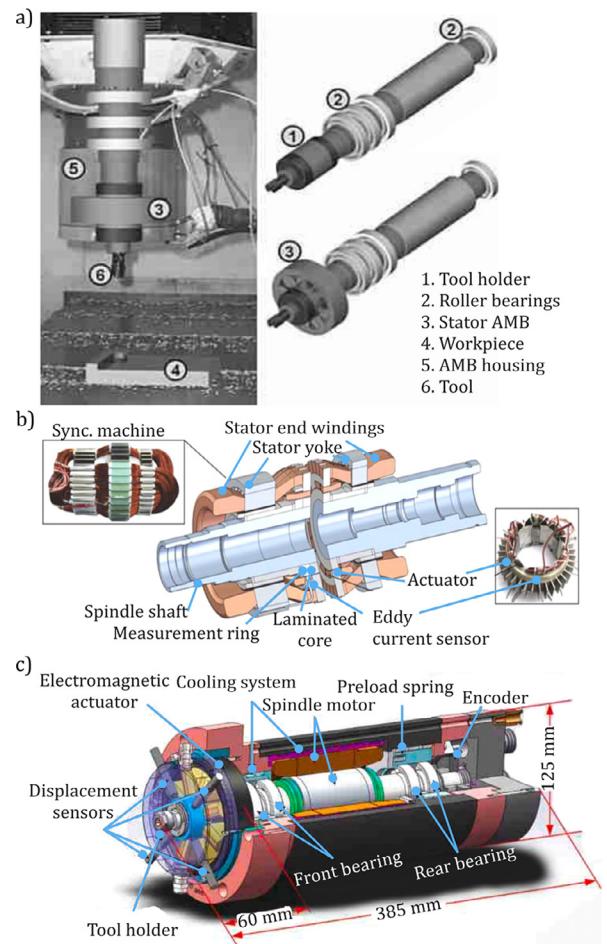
a) AMB integrated into a milling spindle [5], b) permanent magnet synchronous machine [87,140], c) electromagnetic actuator at the spindle nose [272].
